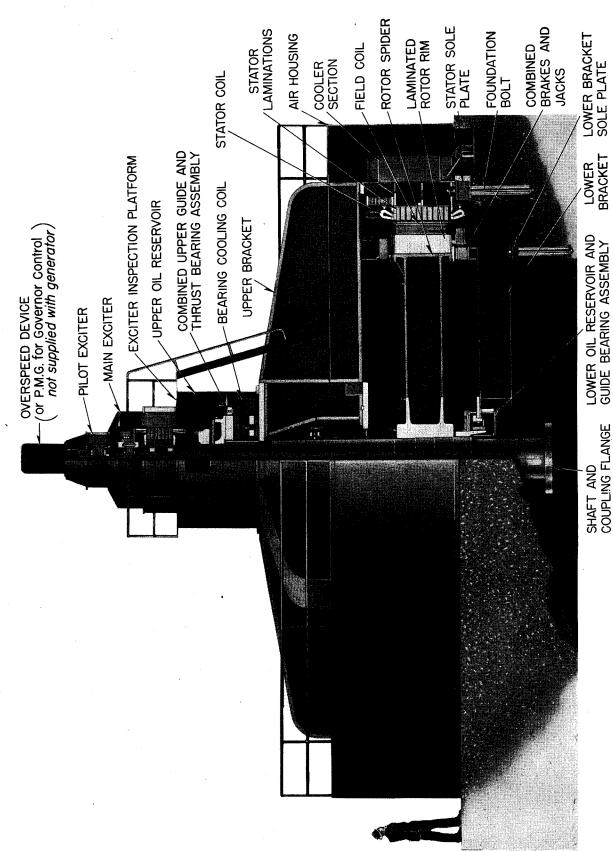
Cross Section View of Conventional Two-Guide Bearing Generator.
